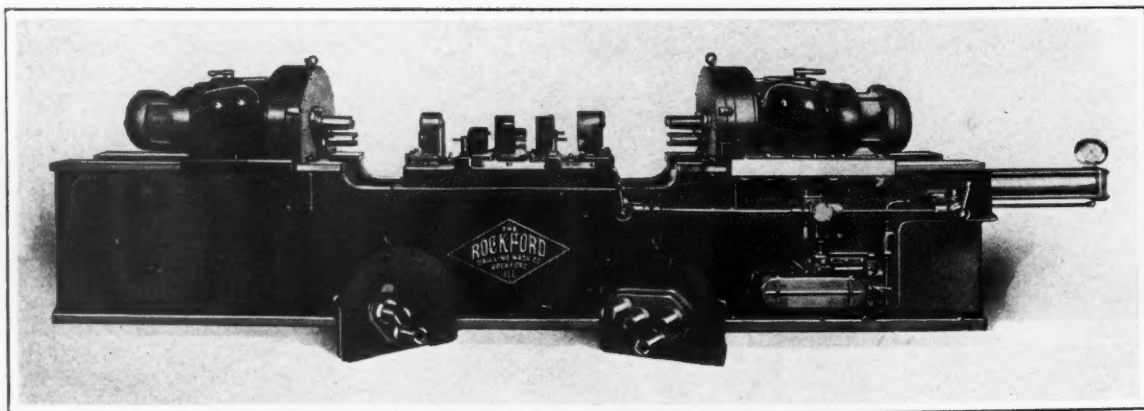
Rockford Double-end Horizontal Machine Designed for Core-drilling Automotive Crankcases
